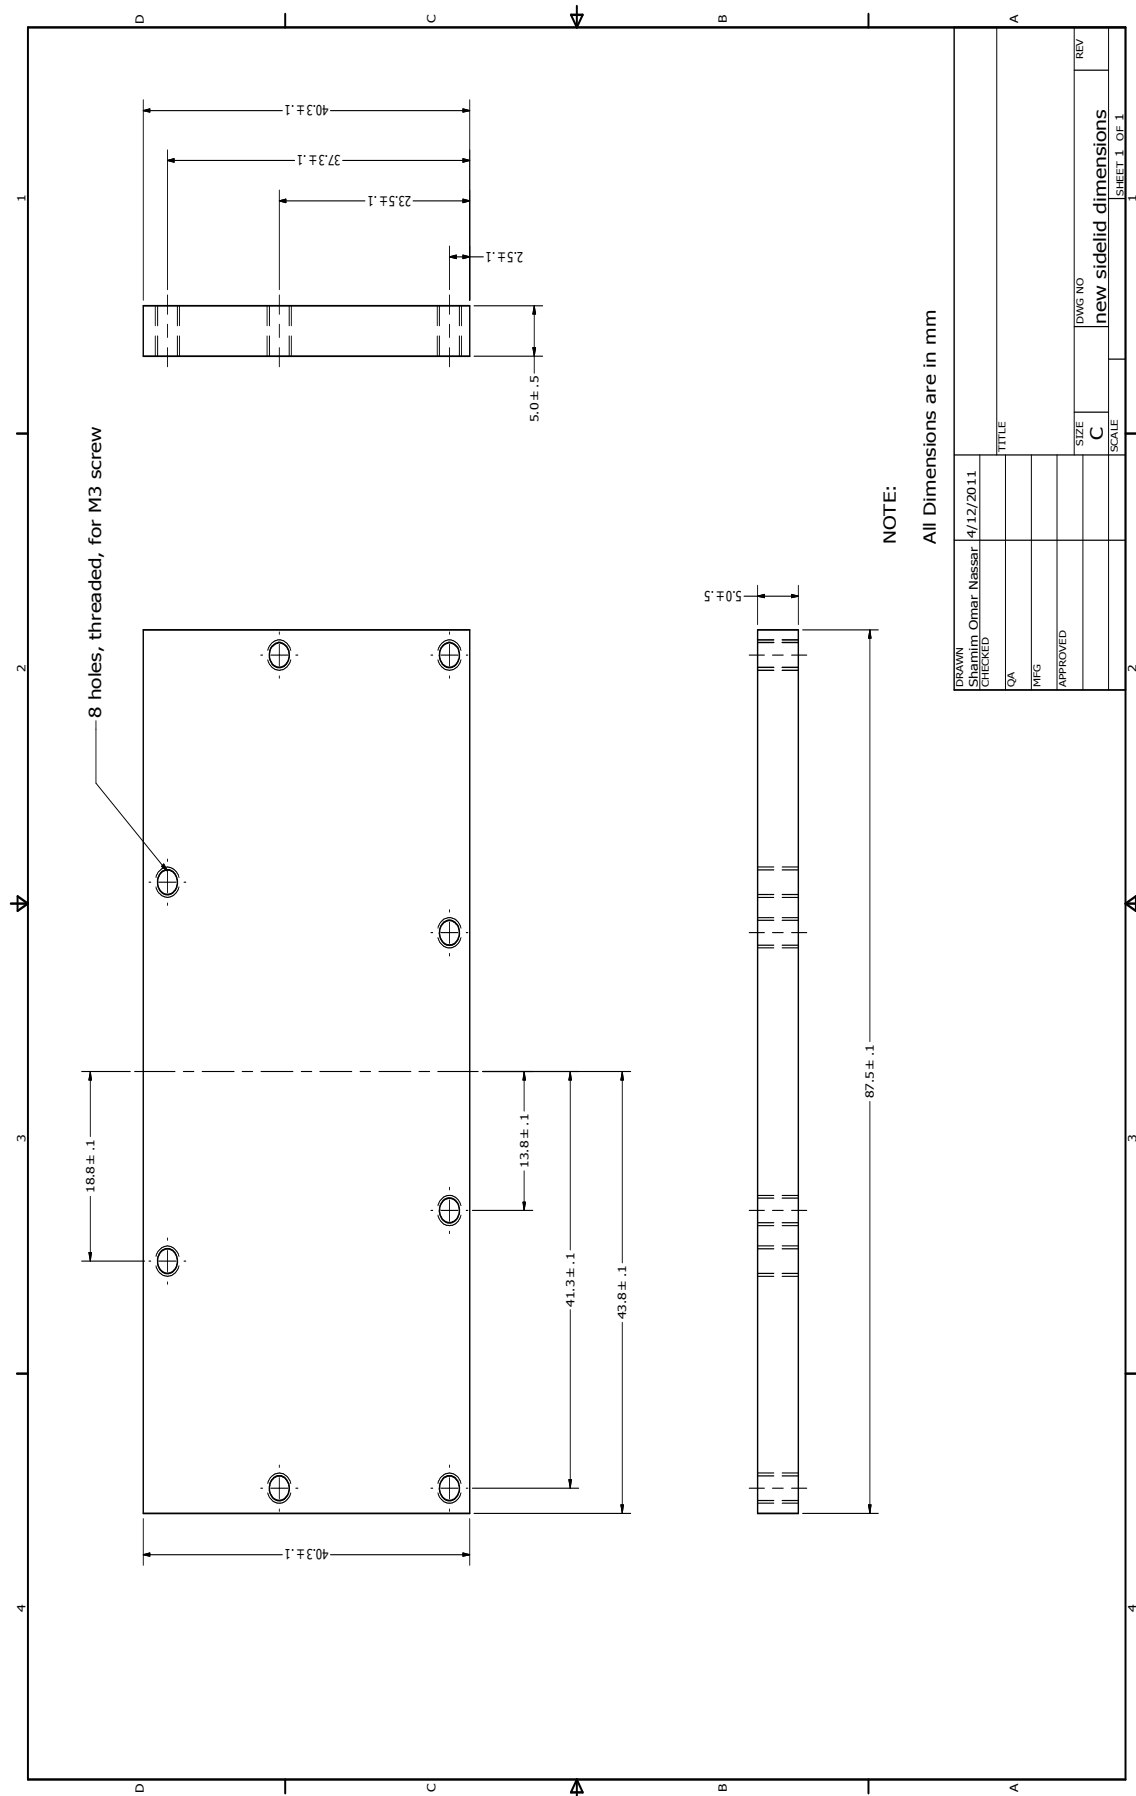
1.3GHz Combine Filter Sidelid Dimensions with threaded Holes - Milling Option
